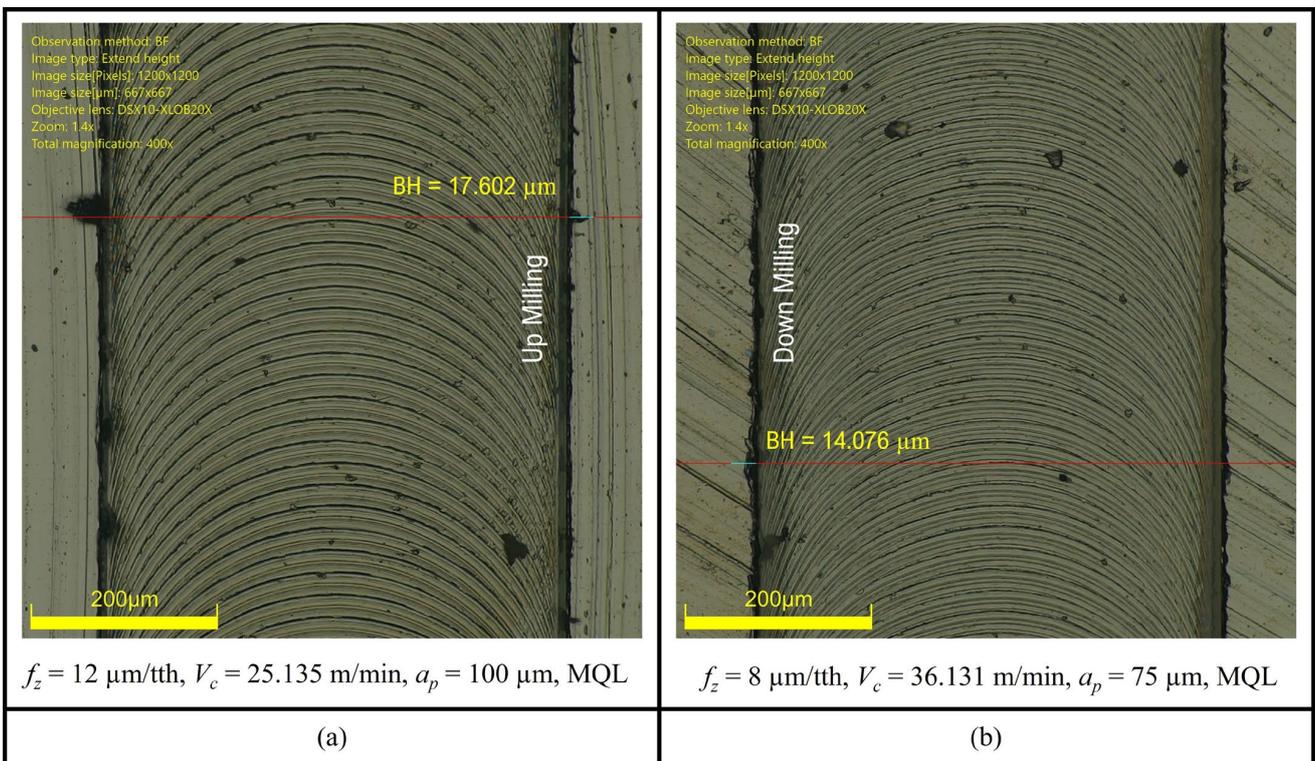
Measurement of burr height using digital microscope: (a) up-milling; (b) down-milling.
